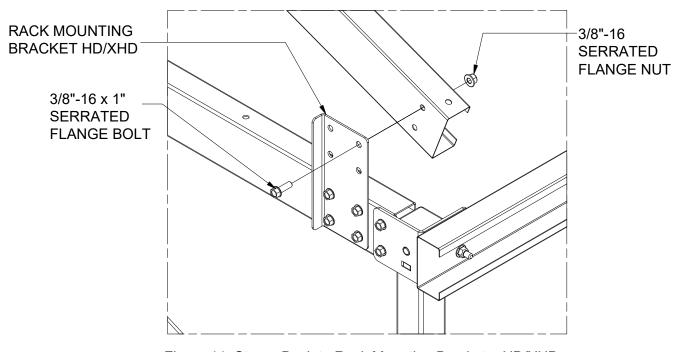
Strong Back to Rack Mounting Bracket - HD/XHD
